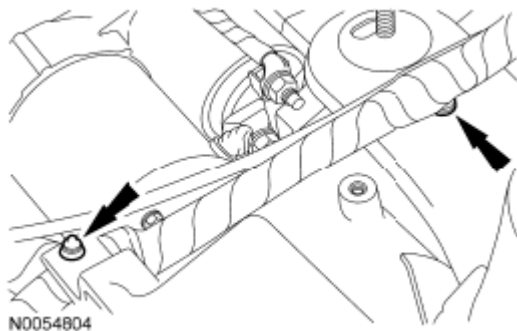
Locating Transmission Mount & Battery Tray Bracket
